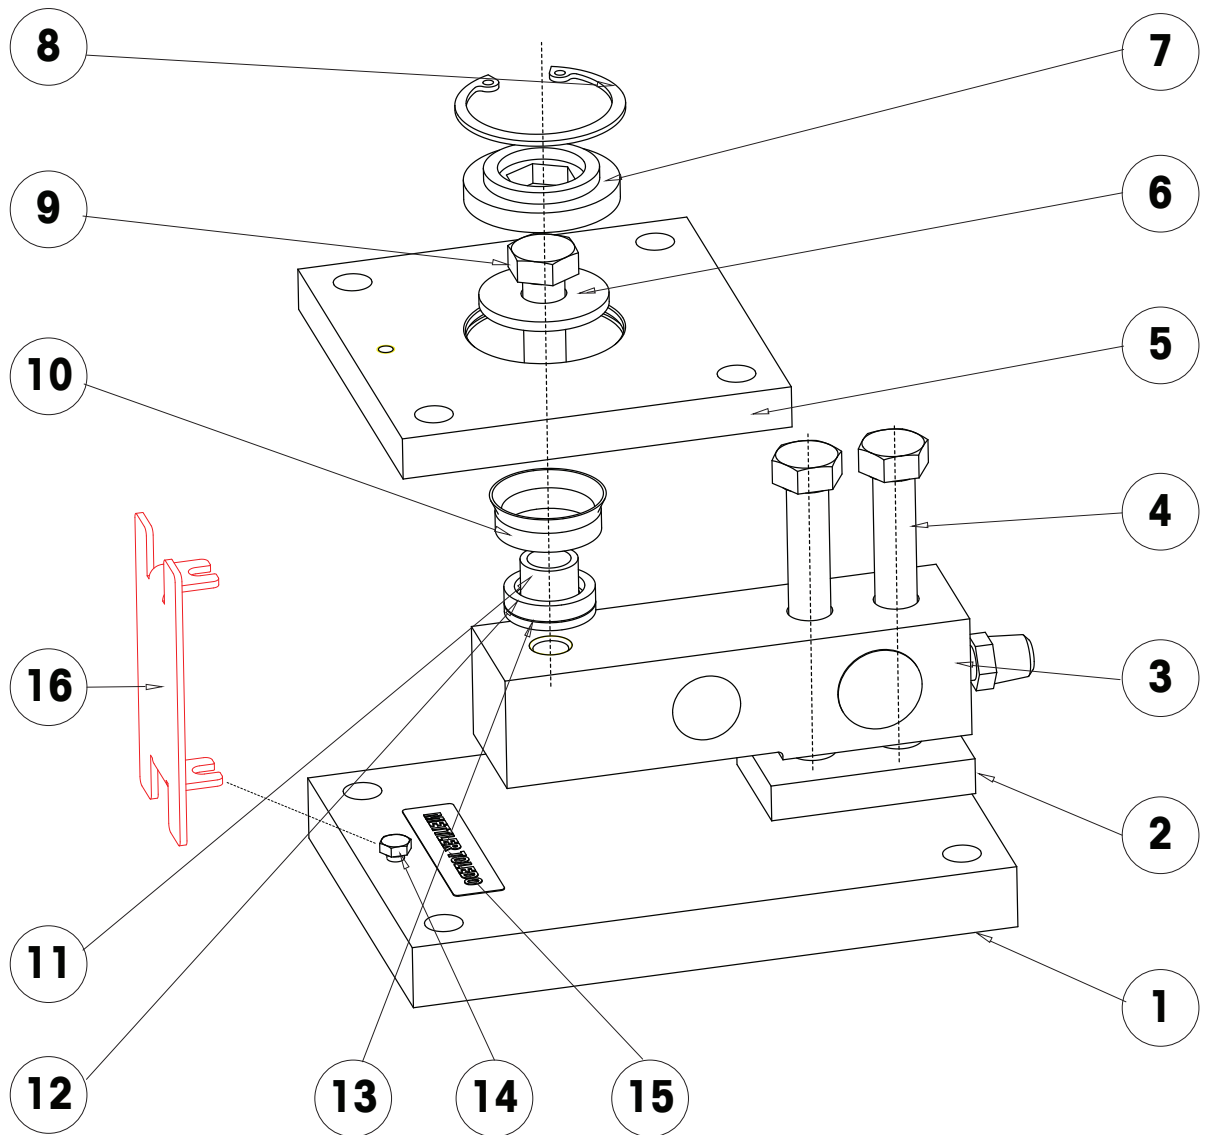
Weigh Module Assembly (Sizes 2 and 3)
